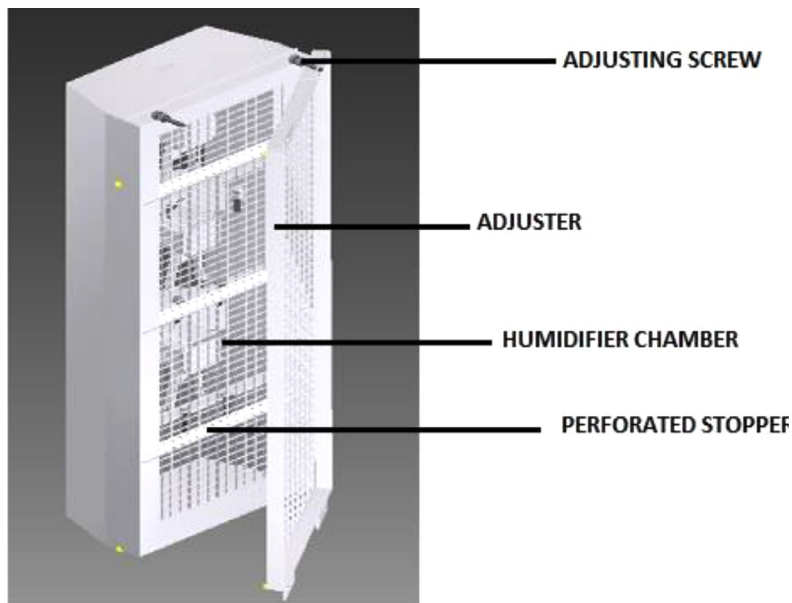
Inner view of the pad holder compartment showing the arrangement of the stopper.
